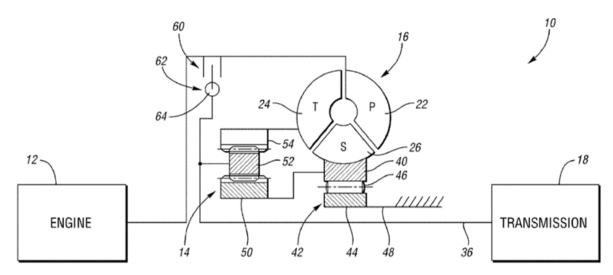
illustrates a combination of a summing planetary gear set (14) and a hydrokinetic torque converter (16). Turbine (24) is connected to ring gear (54) and stator (40) is connected to sun gear (50) such that there are two mechanical connections between planetary gear set (14) and torque converter (16).
